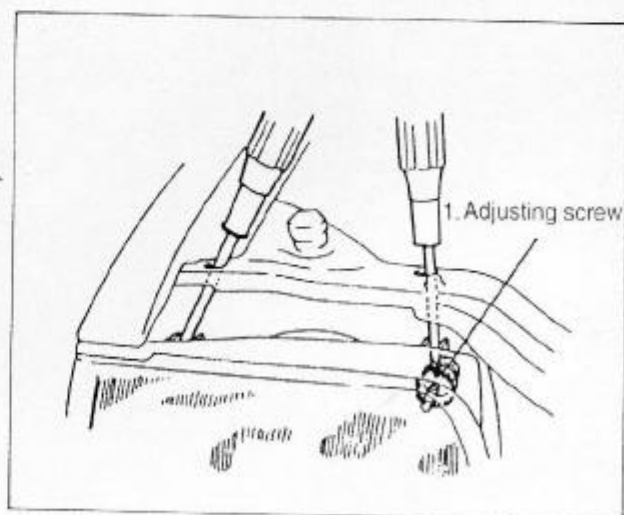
22 HEADLIGHT ADJUSTMENT
